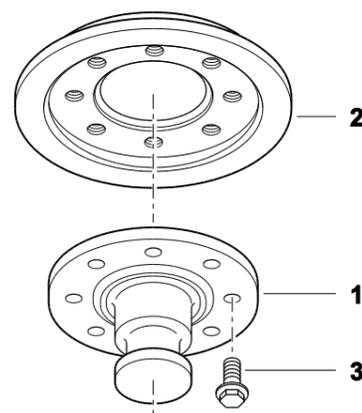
a. – Kingpin (1), socket (2) and securing bolt (3)
